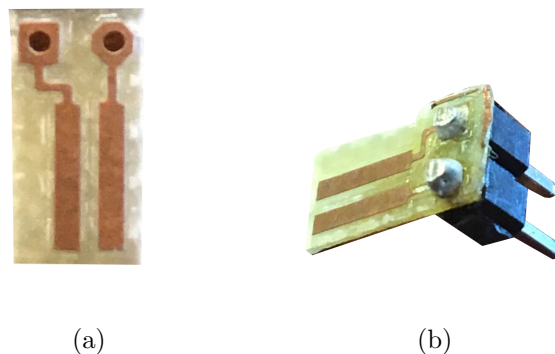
(a) Front view of the new sensing technology showing the copper pads and drill holes. (b) Lateral view showing the soldered connectors.
